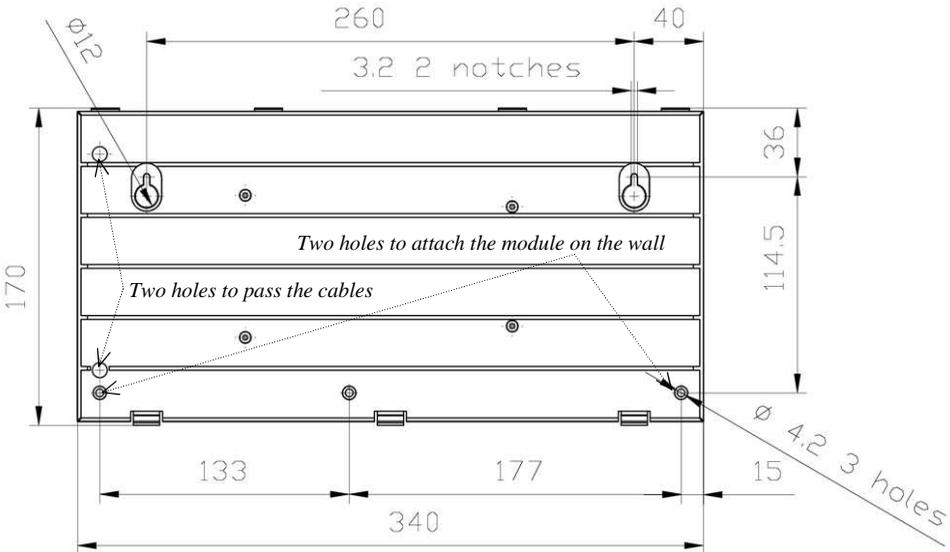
View and Overall and Mounting Dimensions of the Potok-BKI Module
